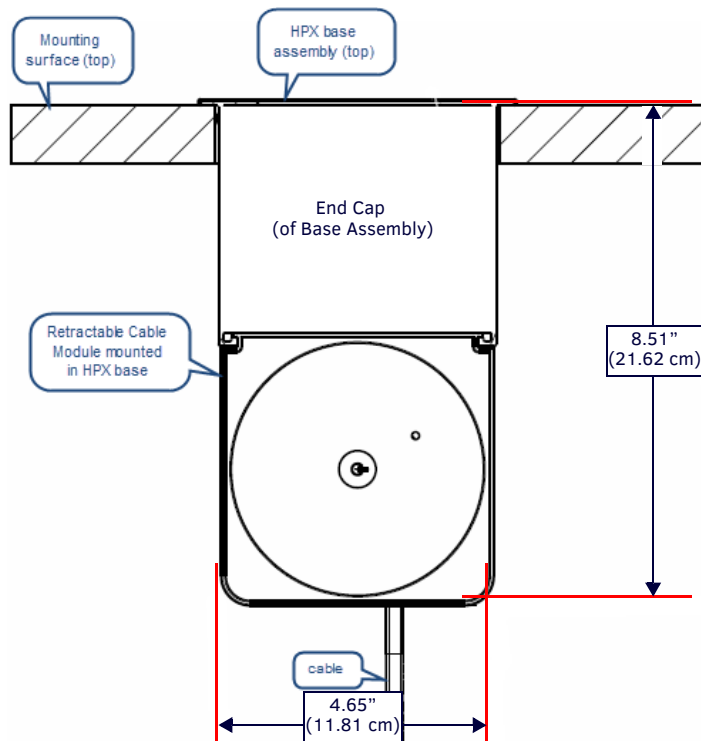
RCM MODULE (INSTALLED IN AN HYDRAPORT BASE) - DETAILED DIMENSIONS
